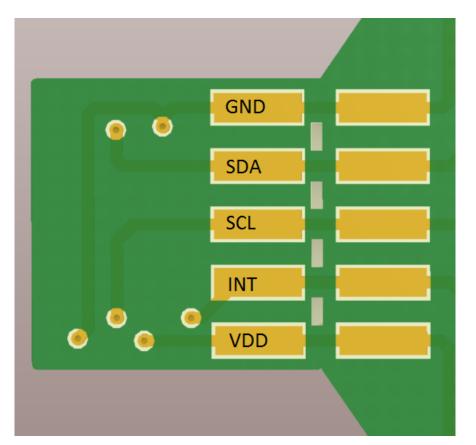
HDC2080EVM : Pads for I2C and Supply of the Smaller Sensor Module
